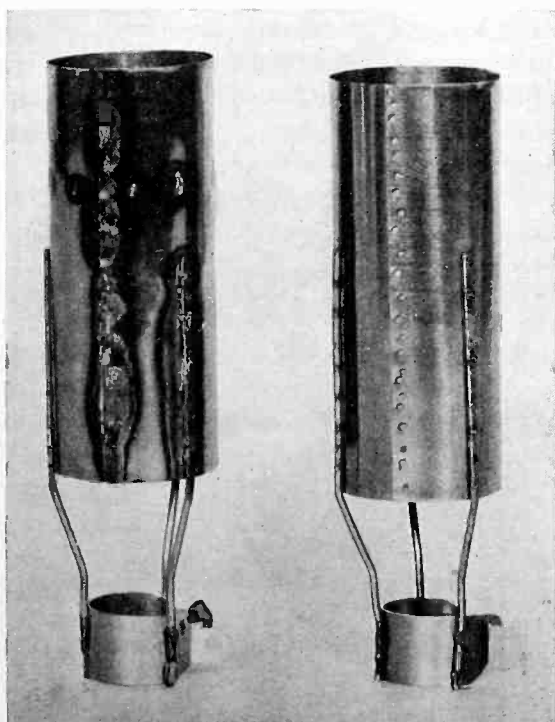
Manual and tube controlled welding of thyatron grid assemblies
